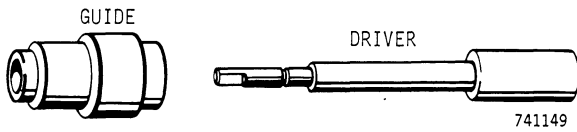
D62915 Tool Kit for Valve Guide Removal and Installation
